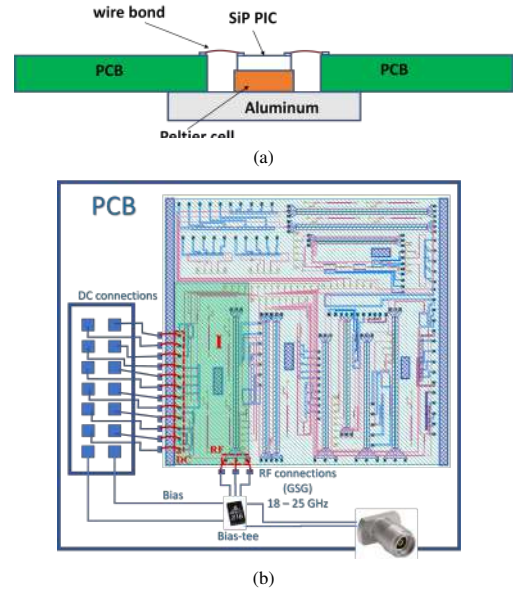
Schematic (a) cross-section and (b) top-view design concept for the developed printed circuit board (PCB)–silicon photonics (SiP) photonic integrated circuit (PIC) assembly.
